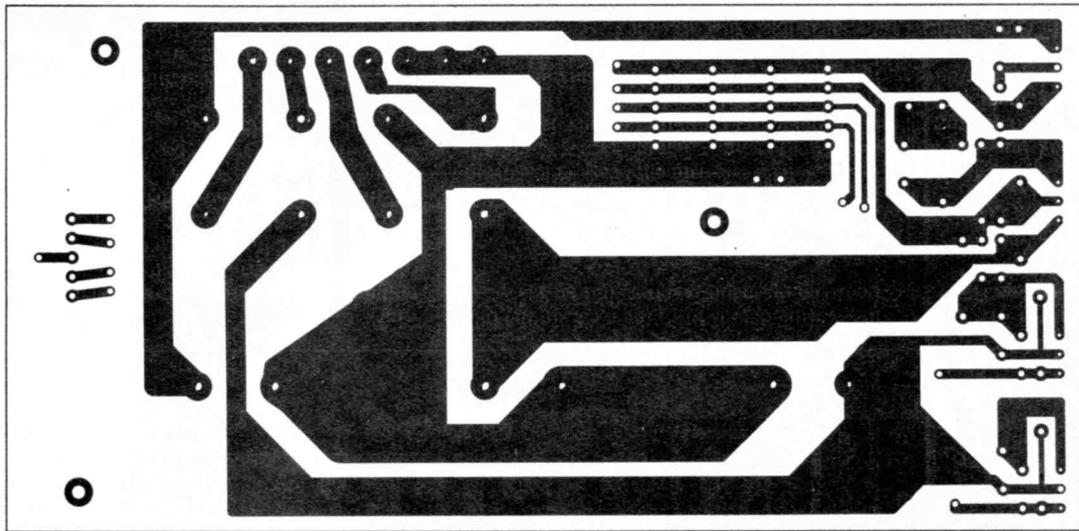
(opposite page). Printed circuit board component layout and topside copper foil master pattern. The underside foil master is shown left.
